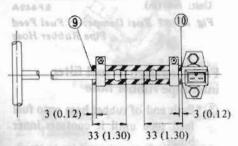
Fuel Filter Outlet to Fuel Pipe Rubber Hose
